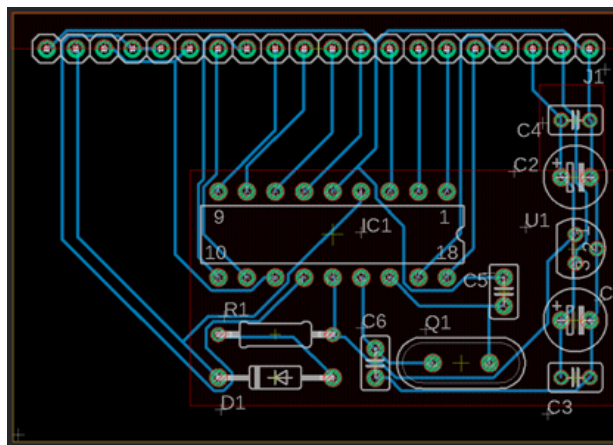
Eagle Generated PCB Layout (From Schematic in Figure 6)
